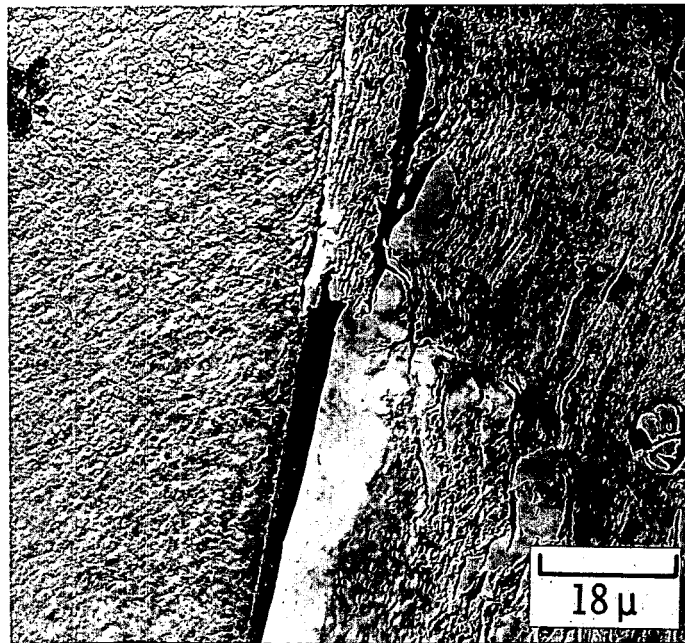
Electron Fractographs Illustrating the Fatigue Fracture Surface Appearance of Modified Heat-Treated Alloy 718 Under Various FCP Rates at 24 and 538°C. (Neg. 7906409-1)
